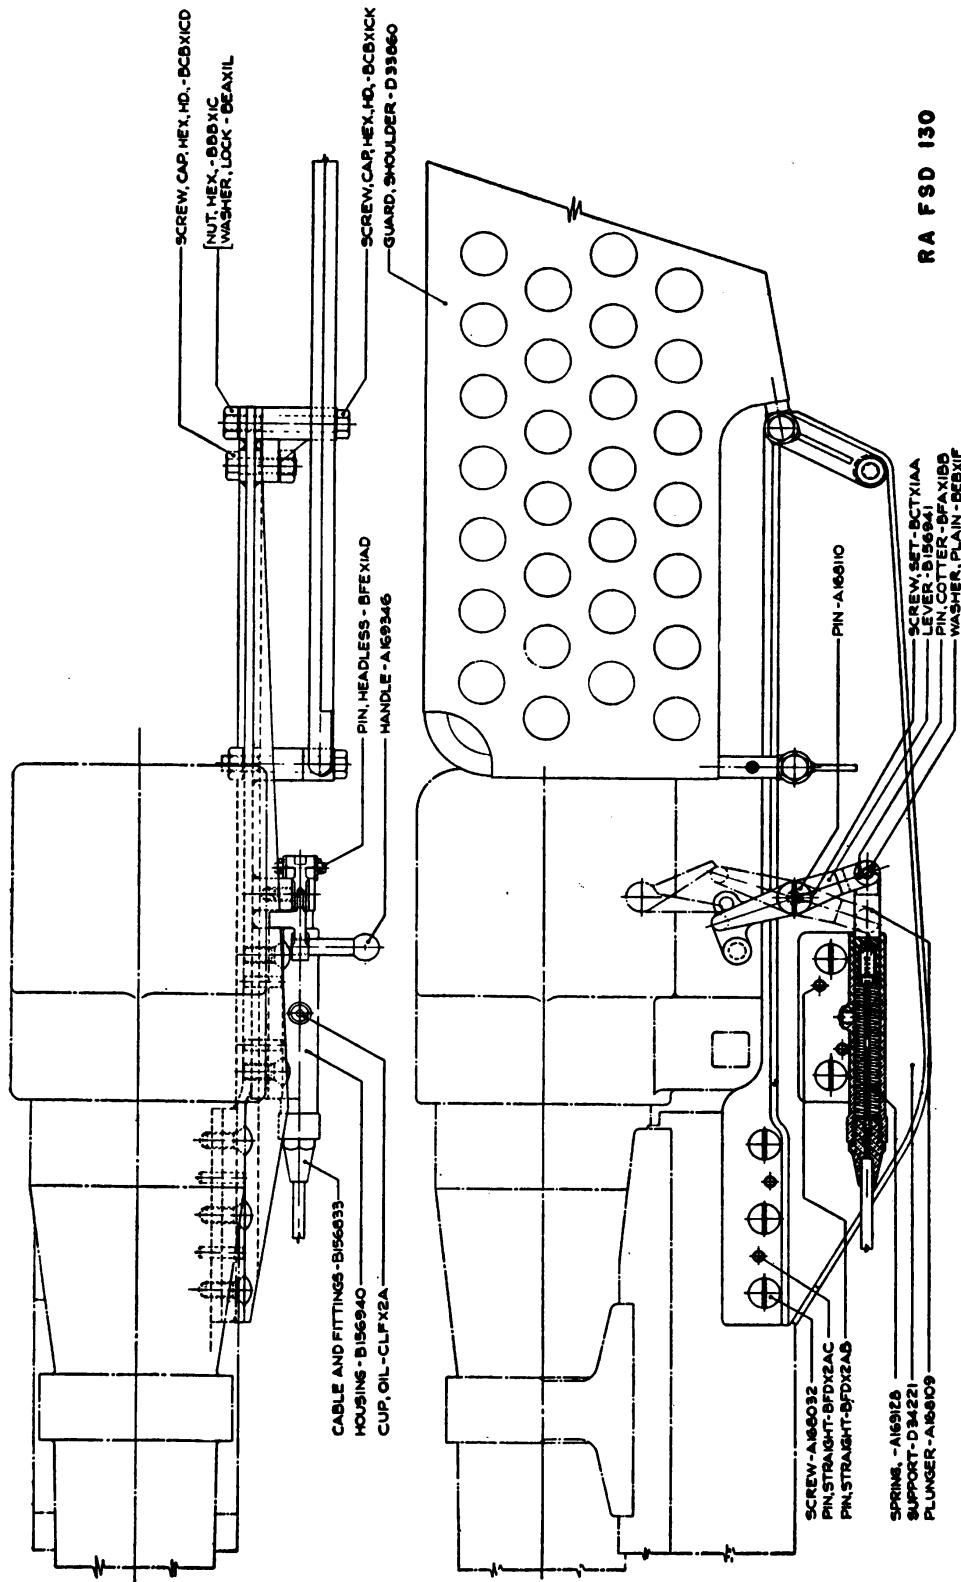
37-mm gun carriage, M4—firing mechanism.
